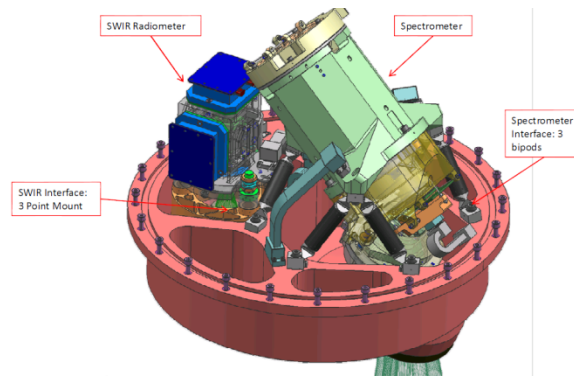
Spectrometer and SWIR assembly mounted on plate. The outside diameter is 16".
